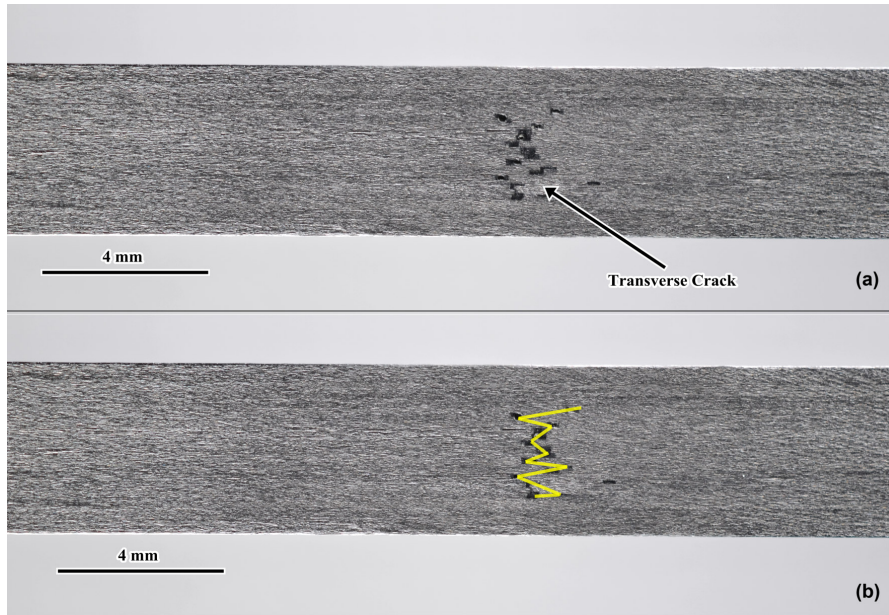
crack macrography: (a) real picture; (b) crack morphology
